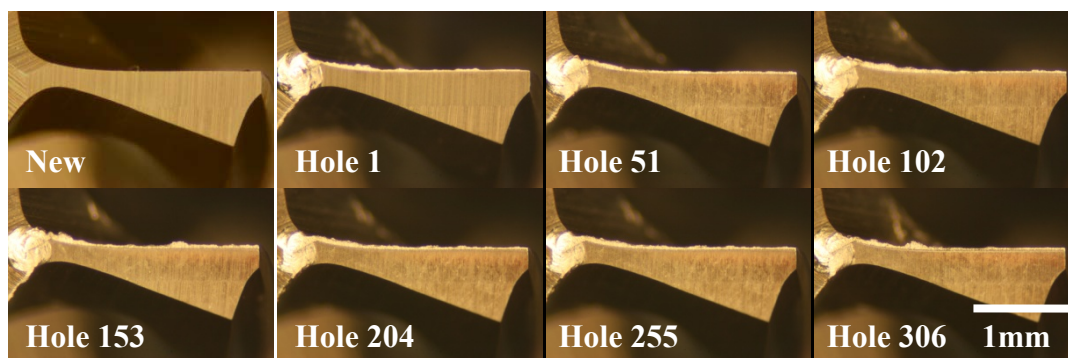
Tool wear micrographs of uncoated carbide drill under 70bar cutting fluid, 130m/min cutting speed (Test 7)
